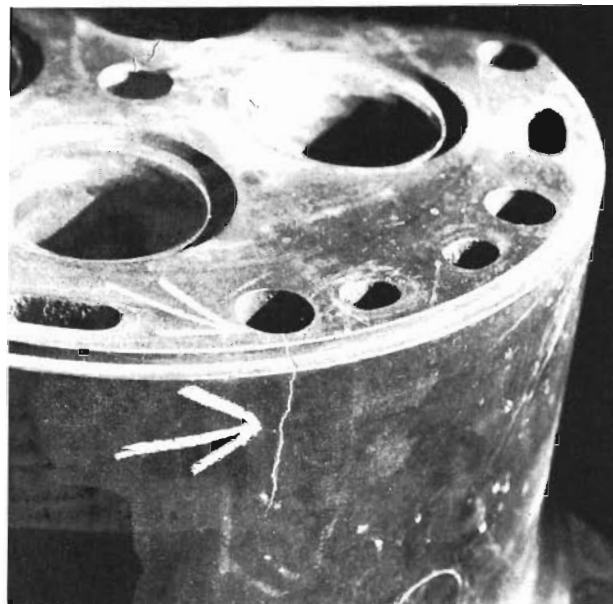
Magnaflux Indication At Stud Hole Of Cylinder Head
